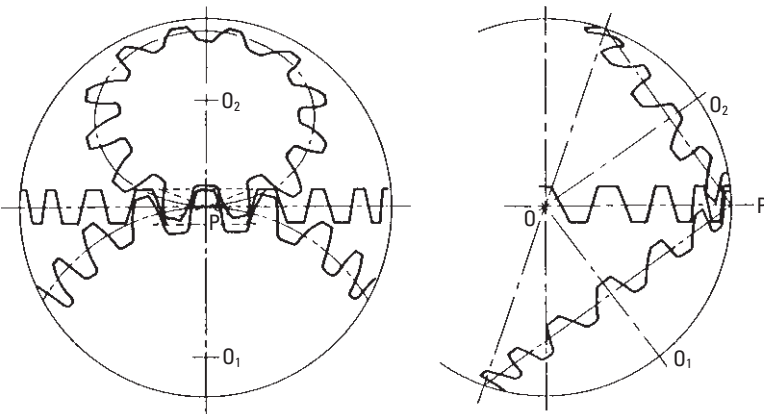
Meshing Bevel Gear Pair with Conjugate Crown Gear
